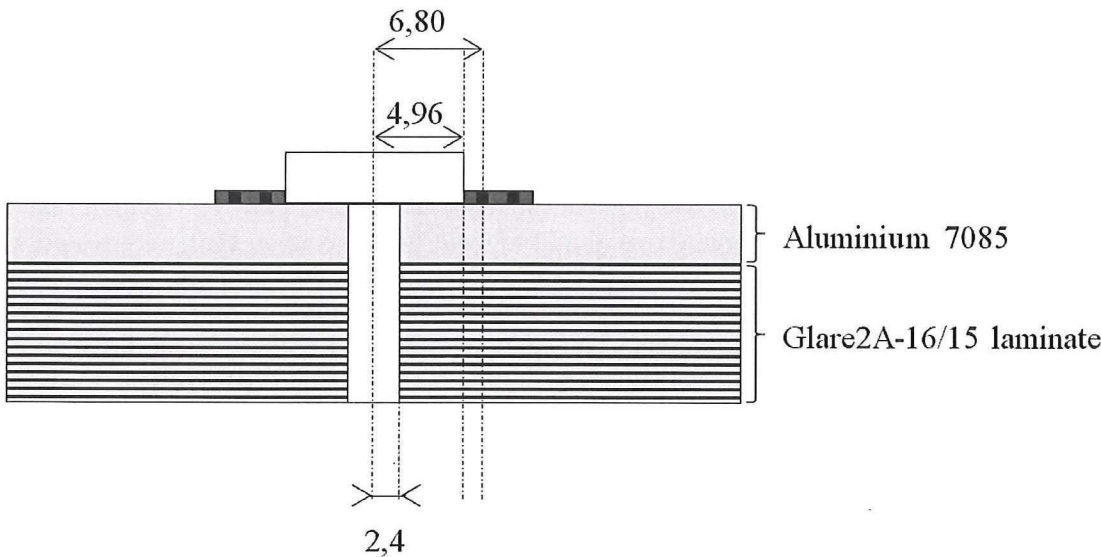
Illustration of the vacuum sensor around the rivet head. Dimensions are in mm. The smallest crack to be measured is  $a = 6.8$  [mm]
